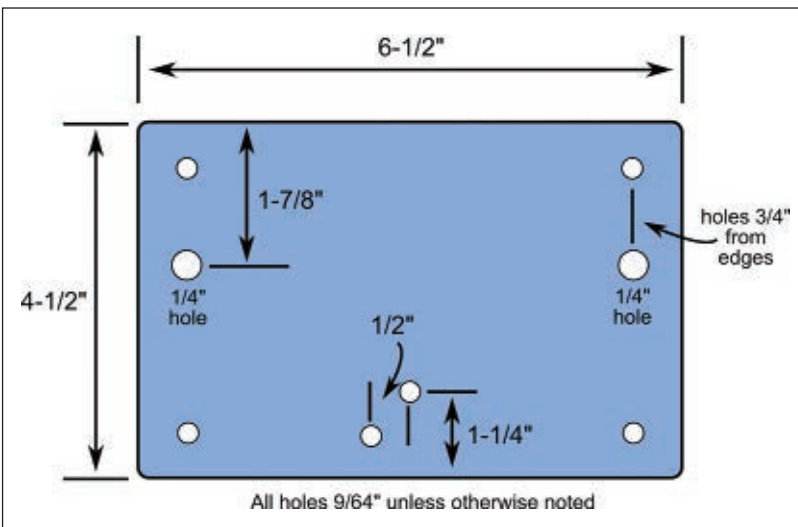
This is the cutting and drilling layout for the BeginnerBot control panel. Use 1/8" wood, plastic, or picture frame mat board.
